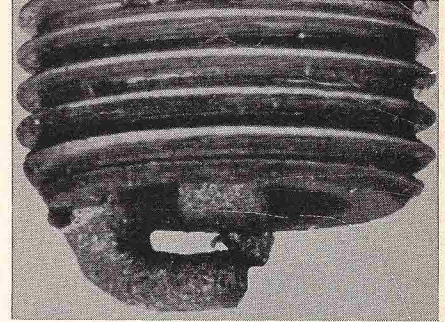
Gray, metallic aluminum deposits on plug. (Seldom encountered). Piston damage due to pre-ignition. Overhaul motor and determine cause of pre-ignition.
